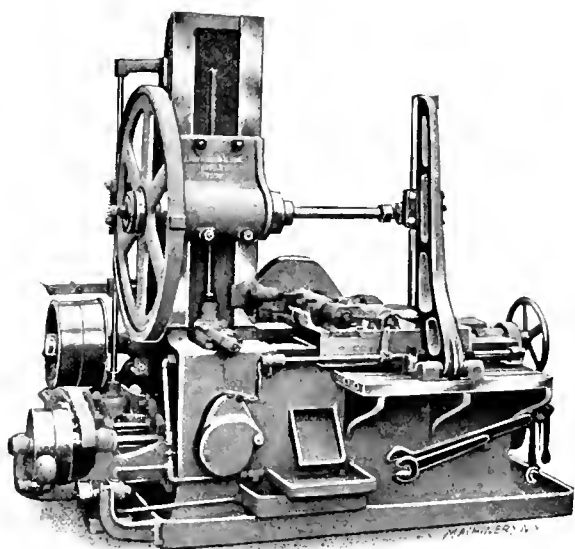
An Example of English Design, built by J. Parkinson & Son.
